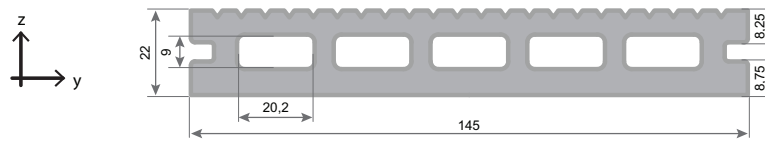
Cross-section of the tested wood plastic composite (WPC) boards. Dimensions are given in mm.
